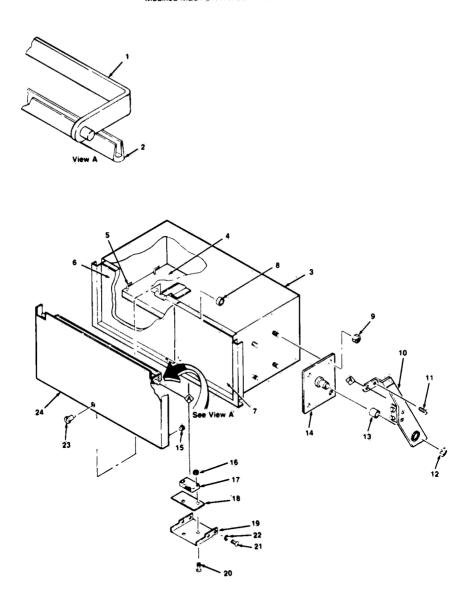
NARCOTIC CABINET ASSEMBLY.
